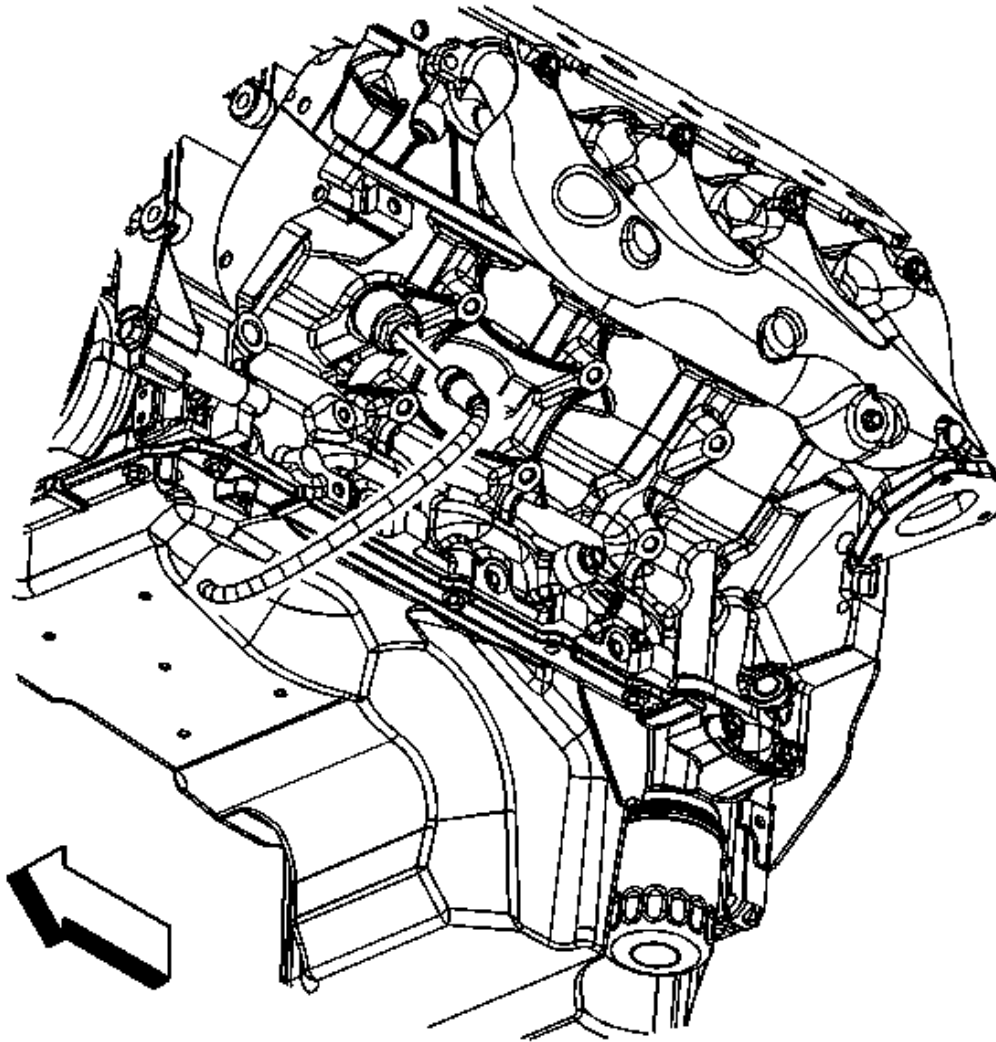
View Of Oil Pan Skid Plate & Bolts
